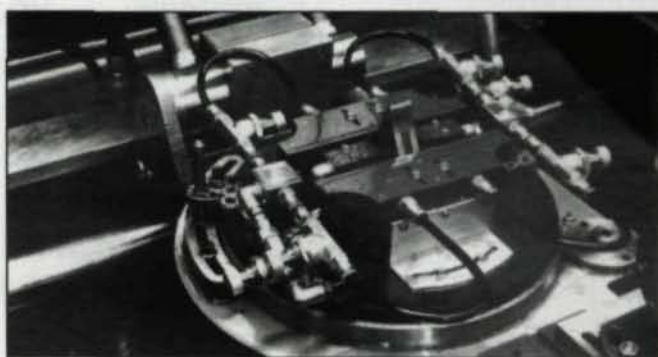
Inductor surrounded by its quenching blocks, all mounted on the workhead transformer.
